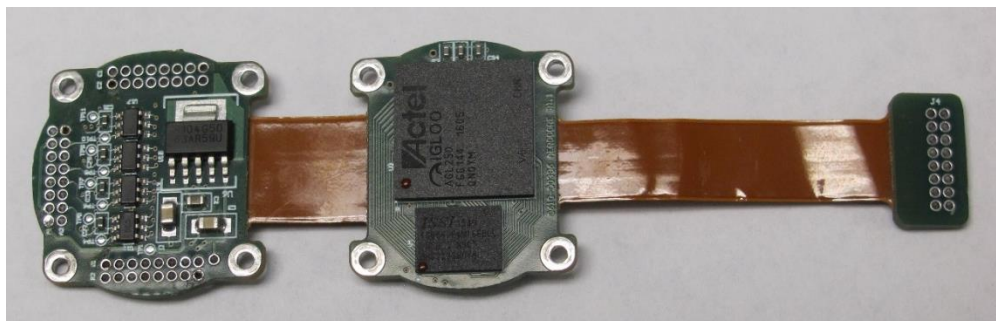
Aerocore Rigid-Flex Circuit Card Assembly
